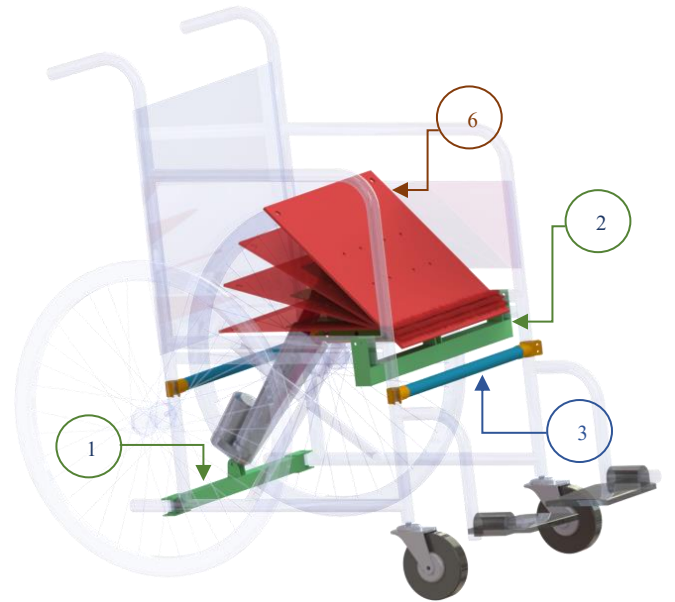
ASSEMBLY OF RESULTING MECHANISM ADAPTED TO COMMERCIAL WHEELCHAIR.
